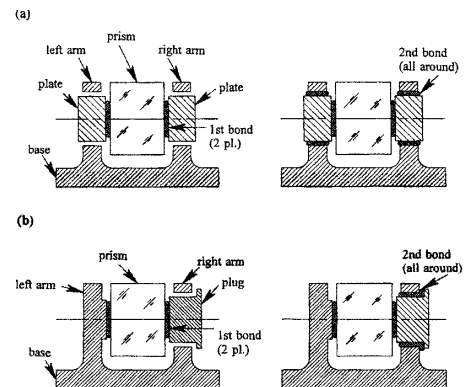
Two concepts for double-sided bonding of a prism to a U-shaped mount [(a) Adapted from Beckmann.]
